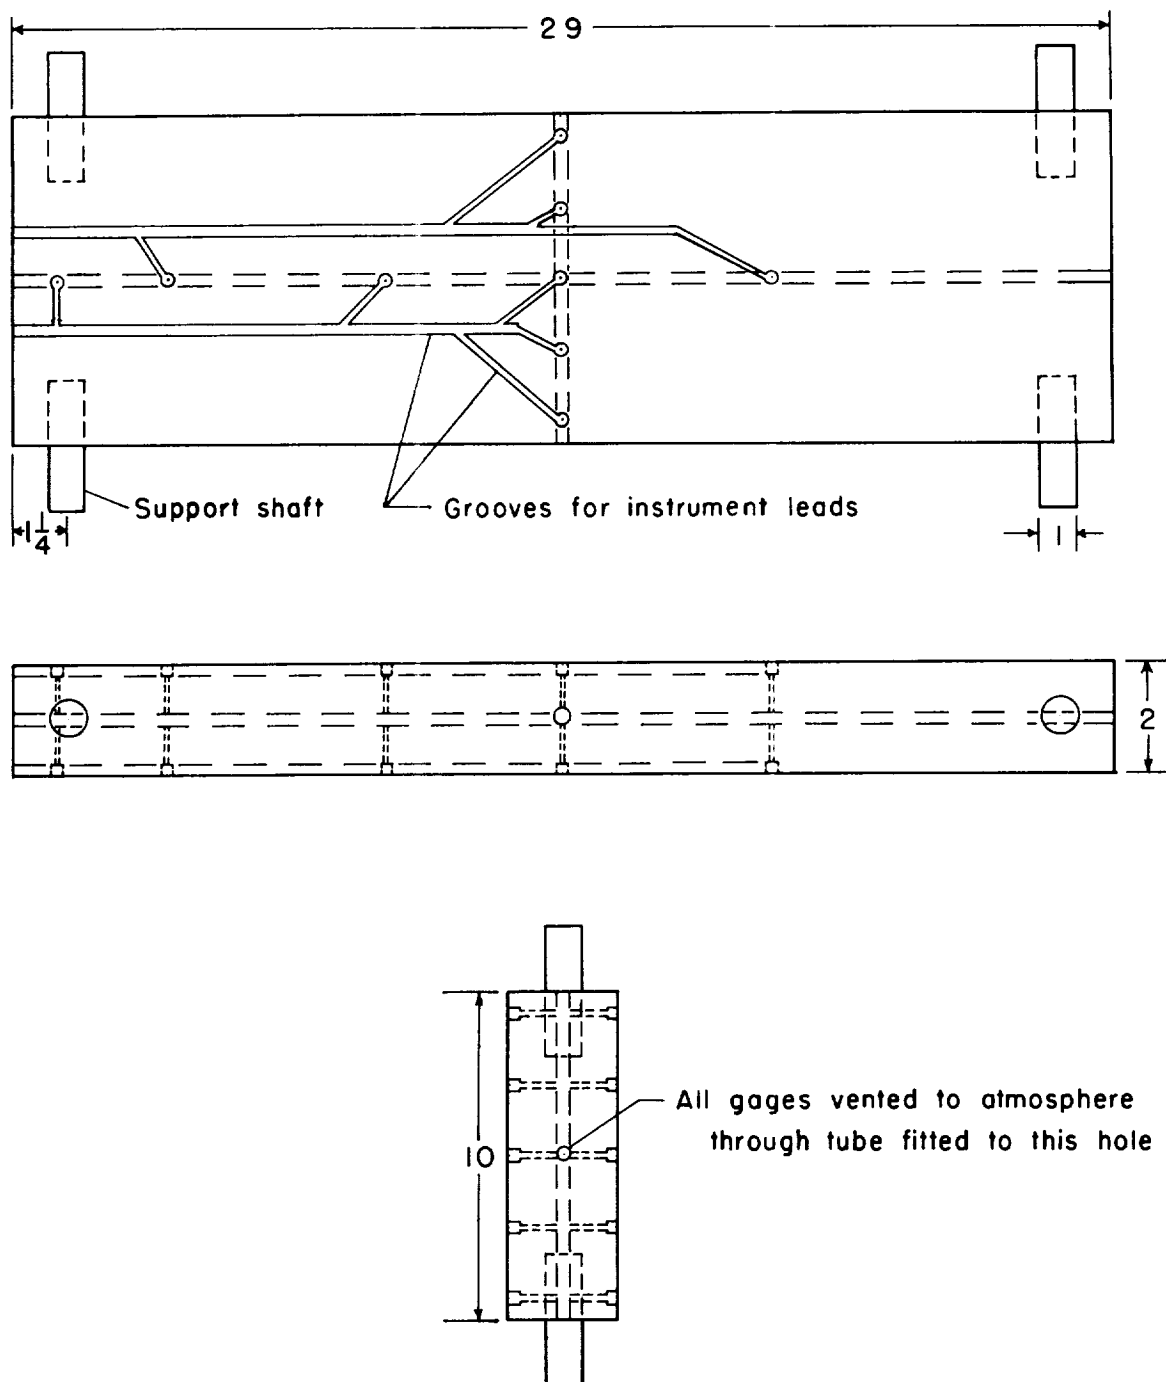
Sketch of steel calibration beam showing pressure-gage locations. All dimensions in inches.
